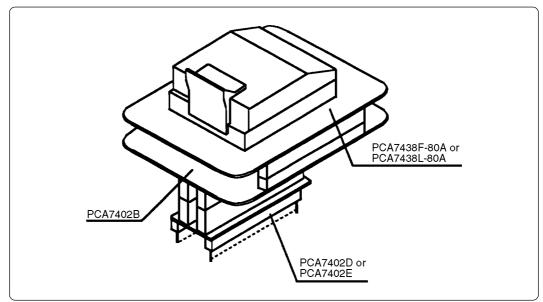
External view of the PCA7438F-80A/PCA7438L-80A and their constituent parts
